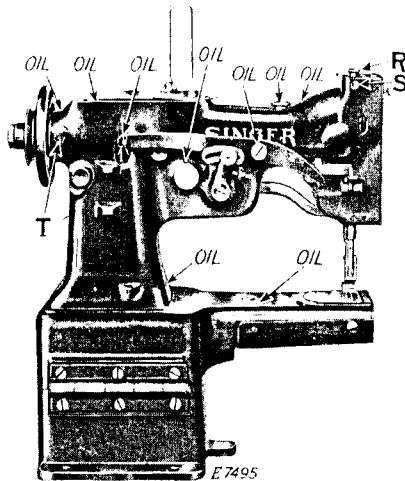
Back View of Machine, Showing Oiling Points Also Adjustments on the Machine
